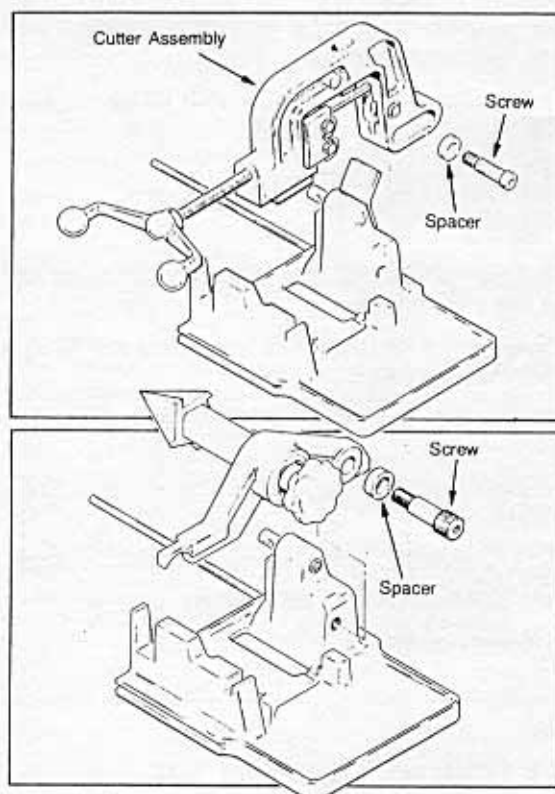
Special Purpose Carriage (shown with Reamer and Cutter Assemblies)
